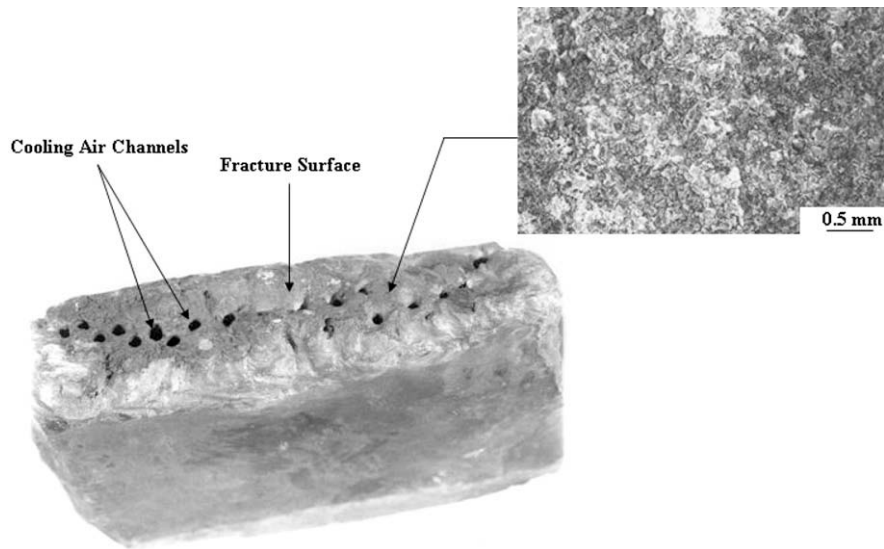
A photograph showing the lower fracture surface of the blade, and corresponding secondary electron macrograph illustrating the surface oxide layer.
